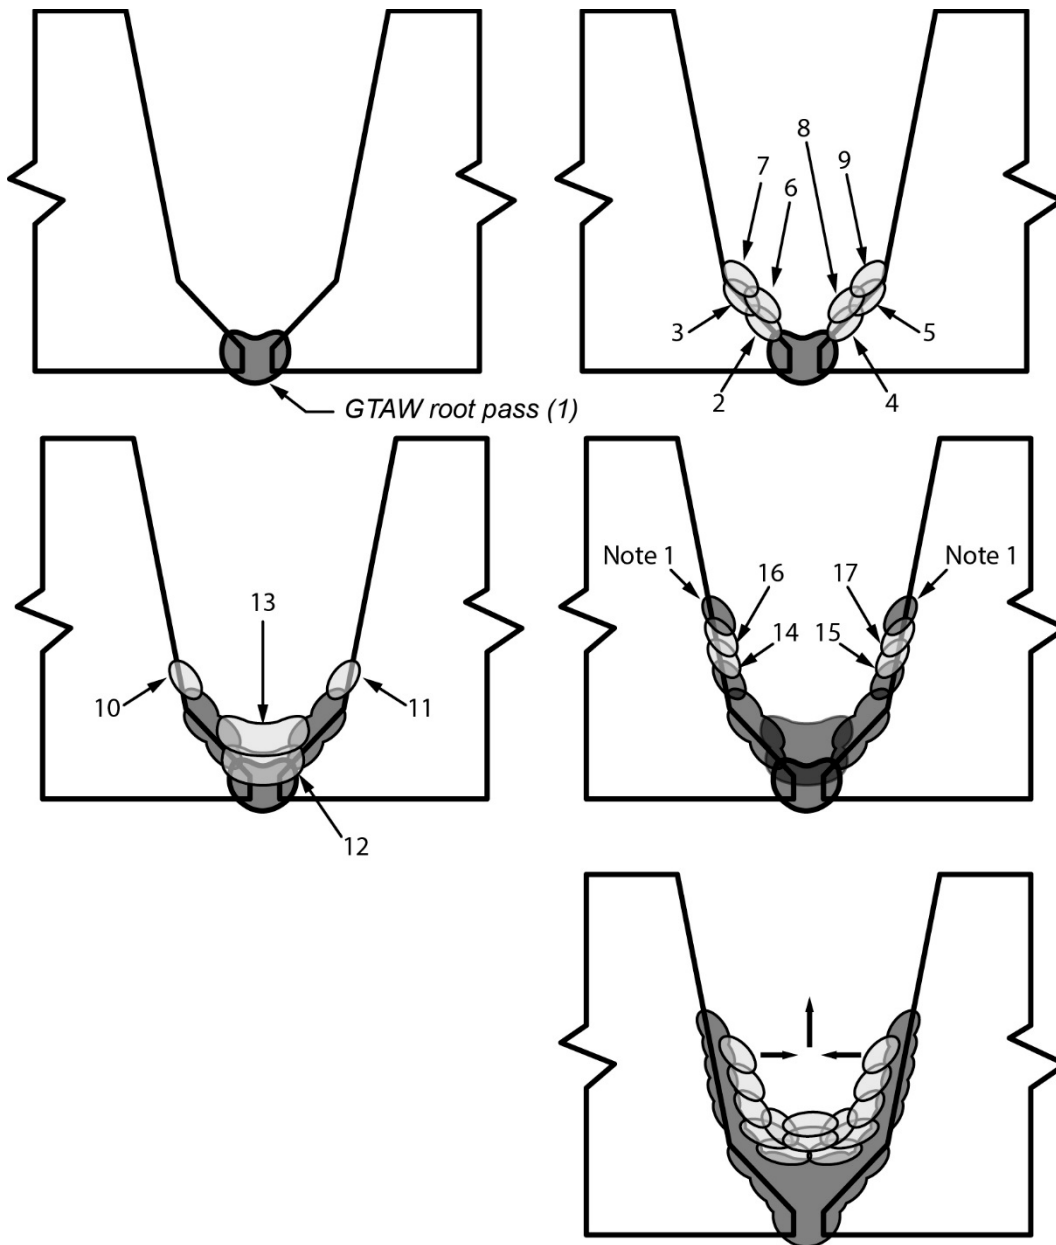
Schematic of the Controlled Fill Welding Procedure for Grade 91 Steel for a Full Penetration Weld Repair Using a Compound Bevel.
